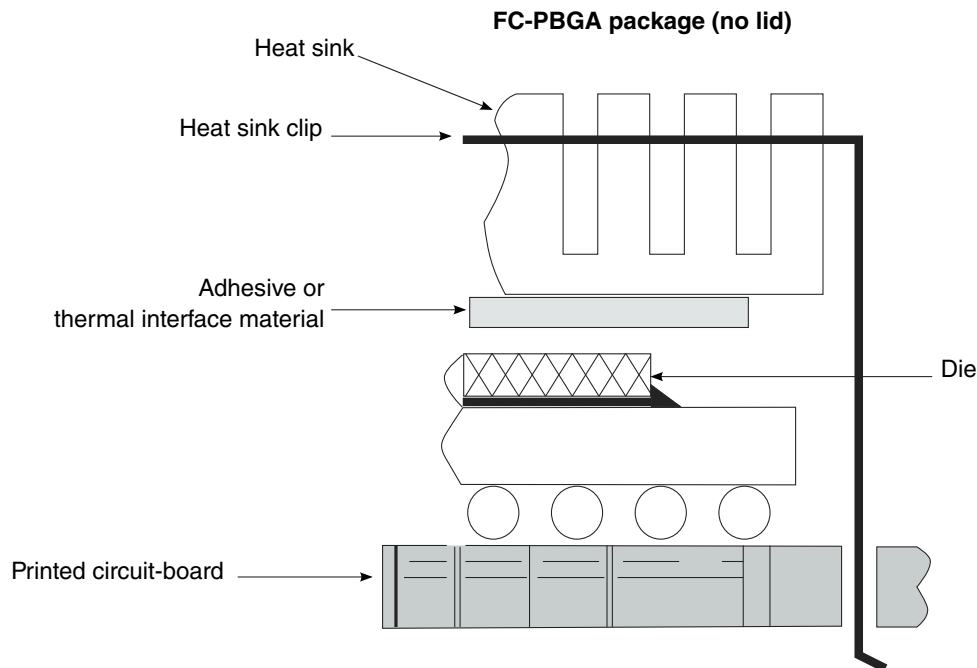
Package exploded, cross-sectional view-FC-PBGA (no lid)
